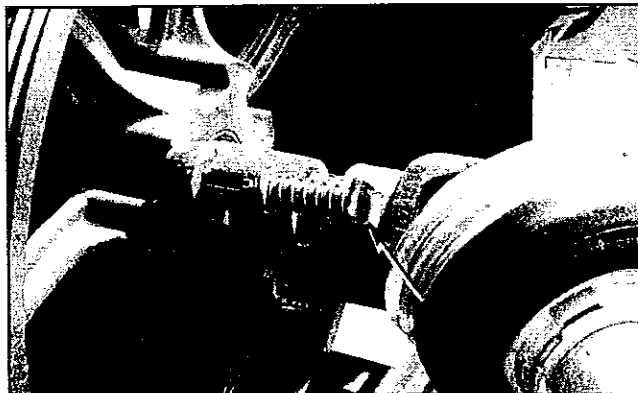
Hammermill clutch pin. Pin is disengaged in photo (shields removed for clarity).
